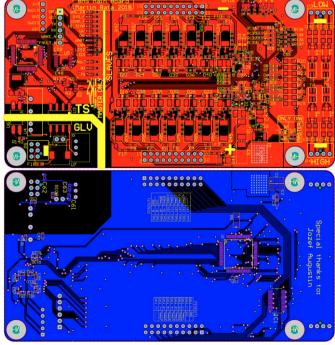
Top (red) and bottom (blue) layout of the designed PCB.
